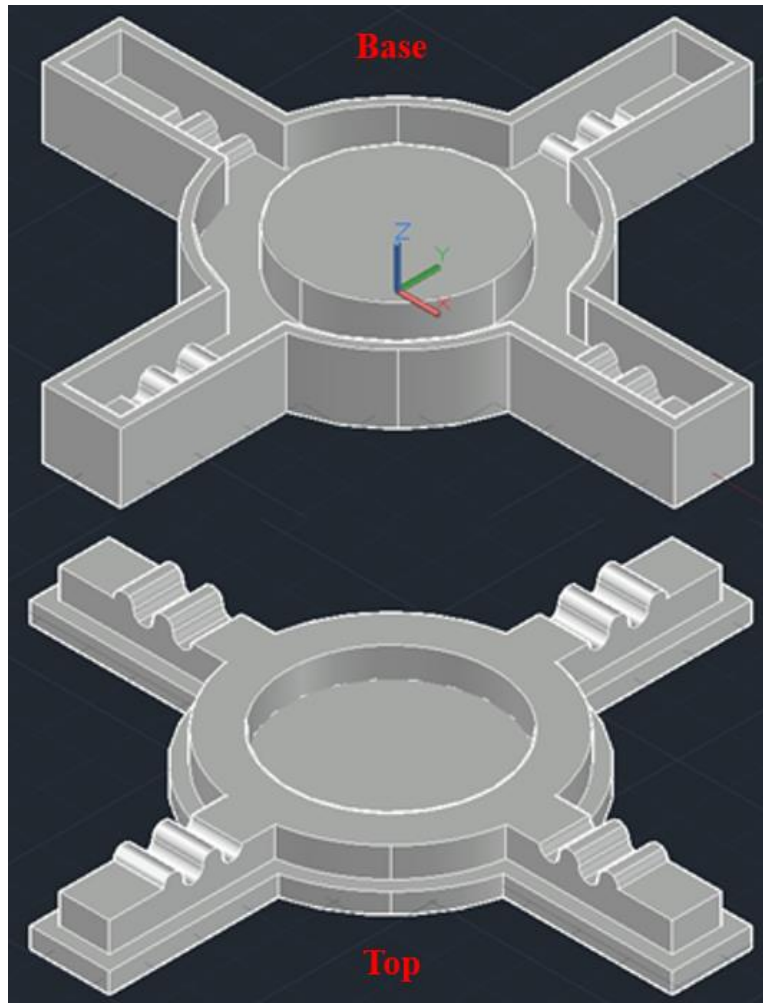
AutoCAD design of the mold used to produce the ecoflex attachments.
